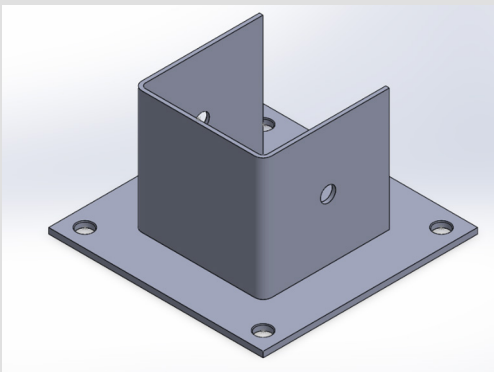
Close up view of post base, the connection between the central vertical beams with the floor and ceiling.
